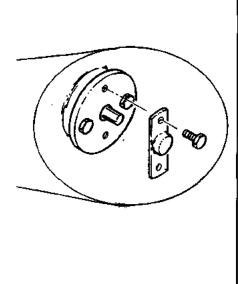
Each rear wheel torque hub must be disengaged before sweeper can be towed. Remove towing plate and remount with dimple facing inward disengaging torque hub.
